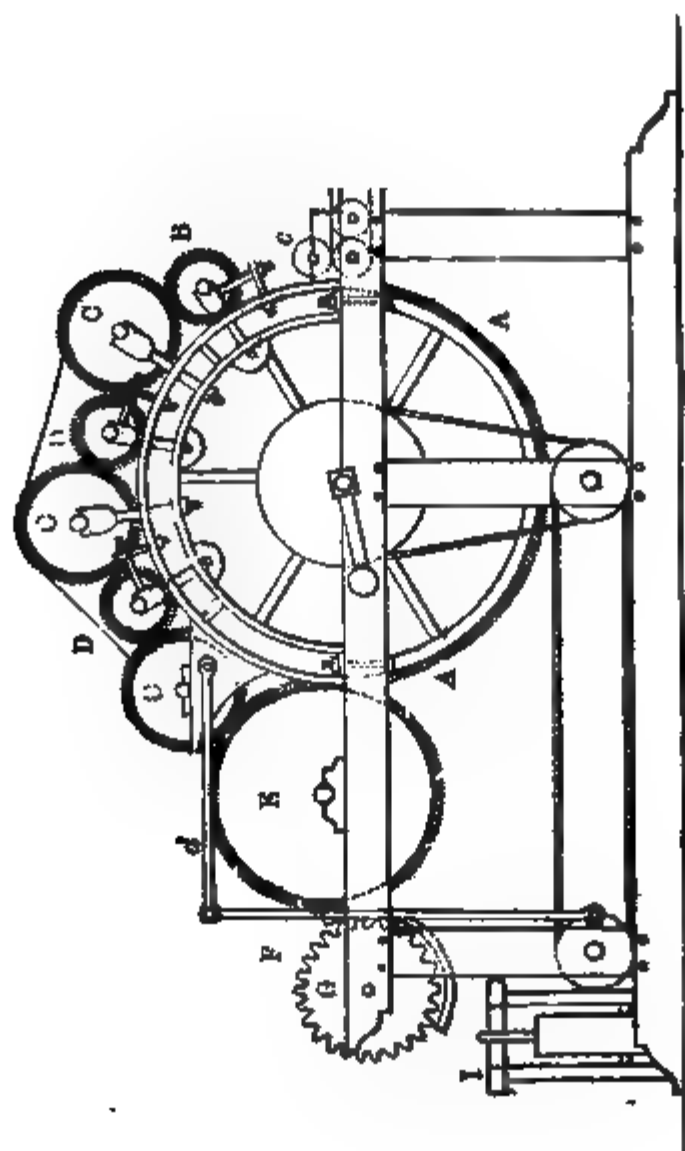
Carding Engine, surmounted with Urchin, or Squirrel Cards.
